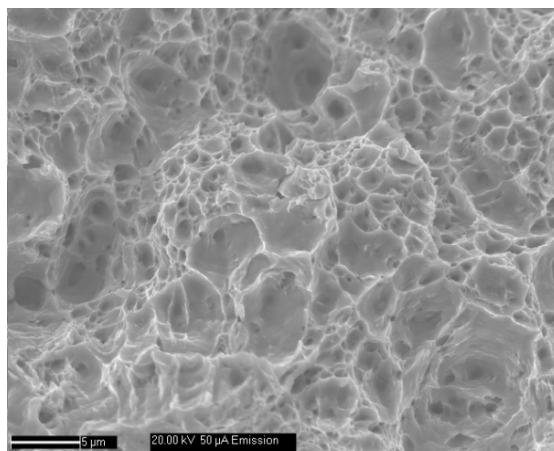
Fracture surface images of tensile tested boron added P91 steel at 573 K.
